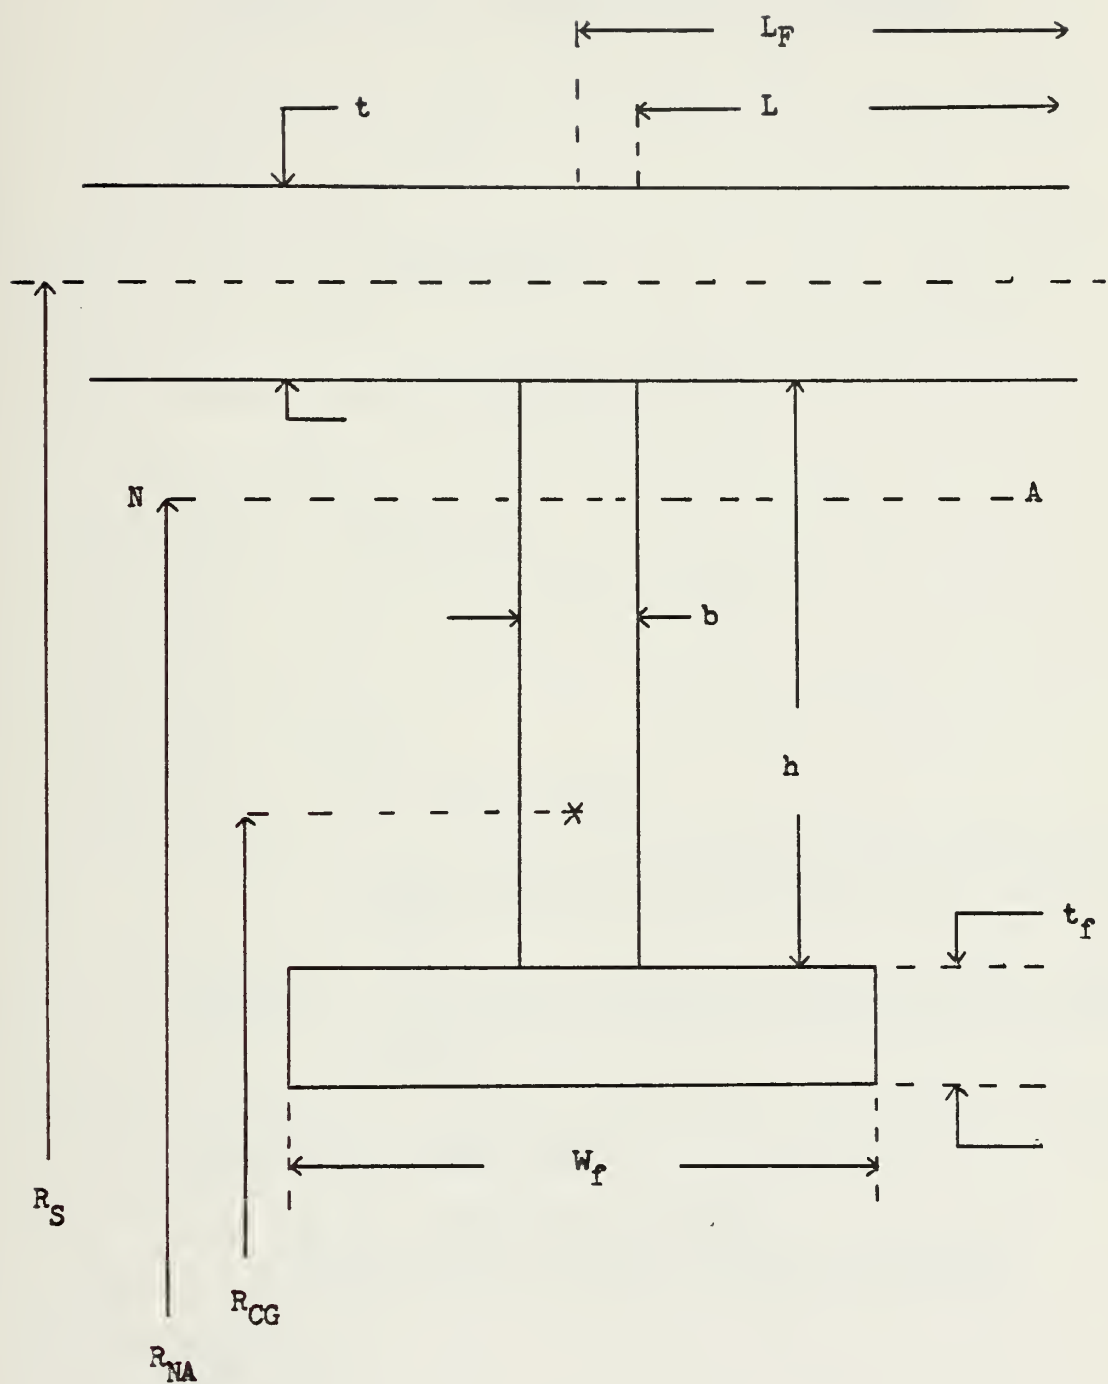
PRESSURE HULL SHELL AND FRAME ARRANGEMENT
